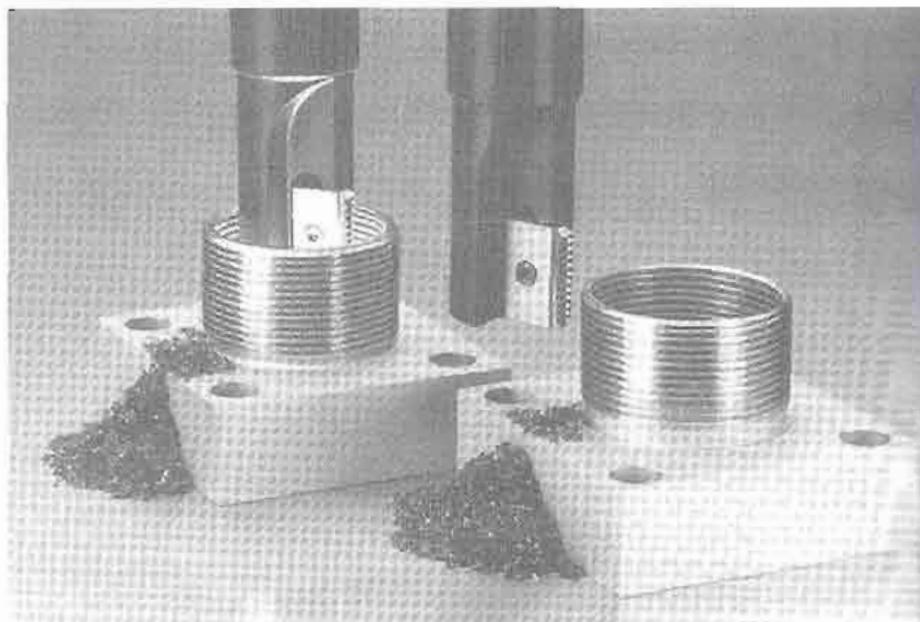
Thread milling on a three-axis NC machine can produce a complete thread in a single feed revolution. (*Ted Mason, American Machinist, November, 1988.*)
